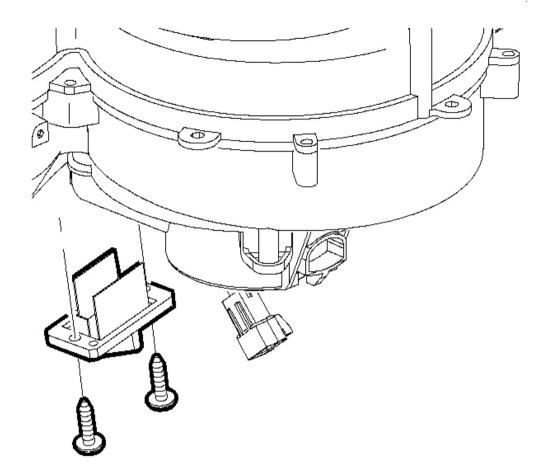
Blower Motor Screws & Blower Case Assembly Courtesy of GENERAL MOTORS CORP.
